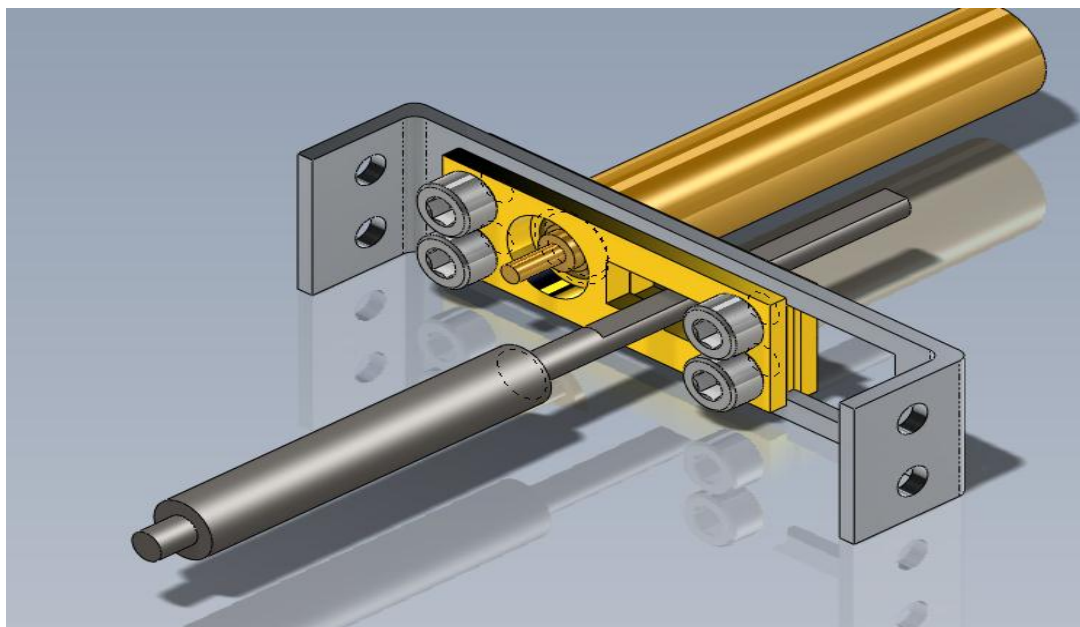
Gear Box Support Brackets Used as Intended. Threaded Version is on Reverse Side
